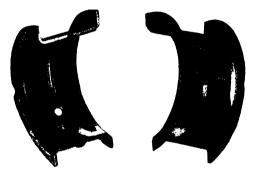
Typical steel-backed main bearing of passenger-car engine
